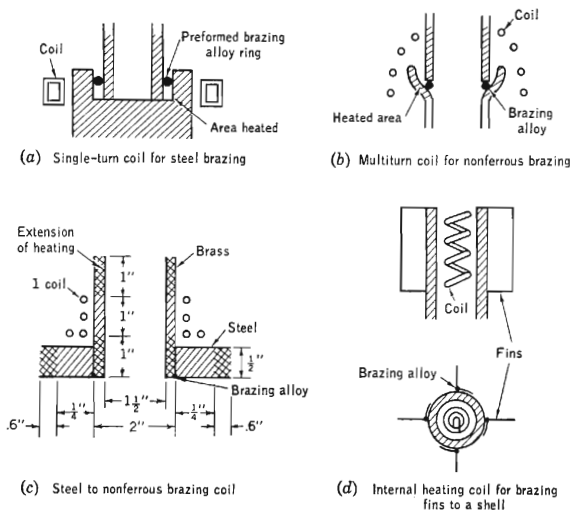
Typical induction brazing and soldering coil shapes.
